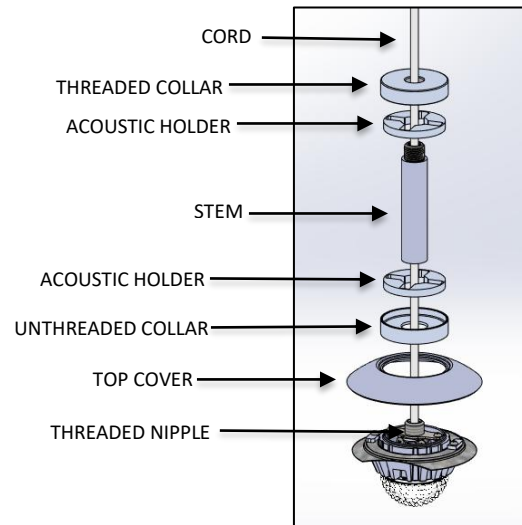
ACOUSTIC PANEL HOLDER ASSEMBLY
